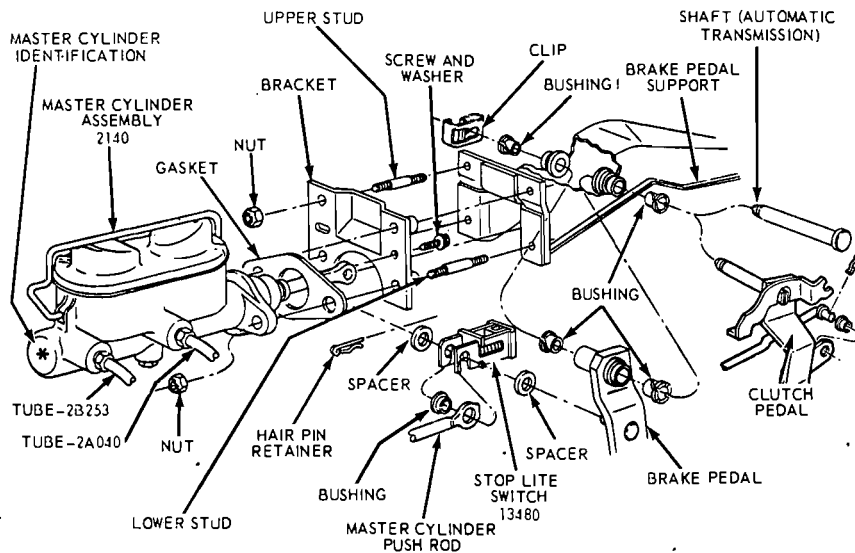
Master Cylinder Installation—Non Power Brake—Torino and Montego
